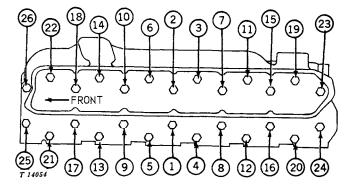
Proper Sequence for Tightening Cylinder Head Cap Screws
